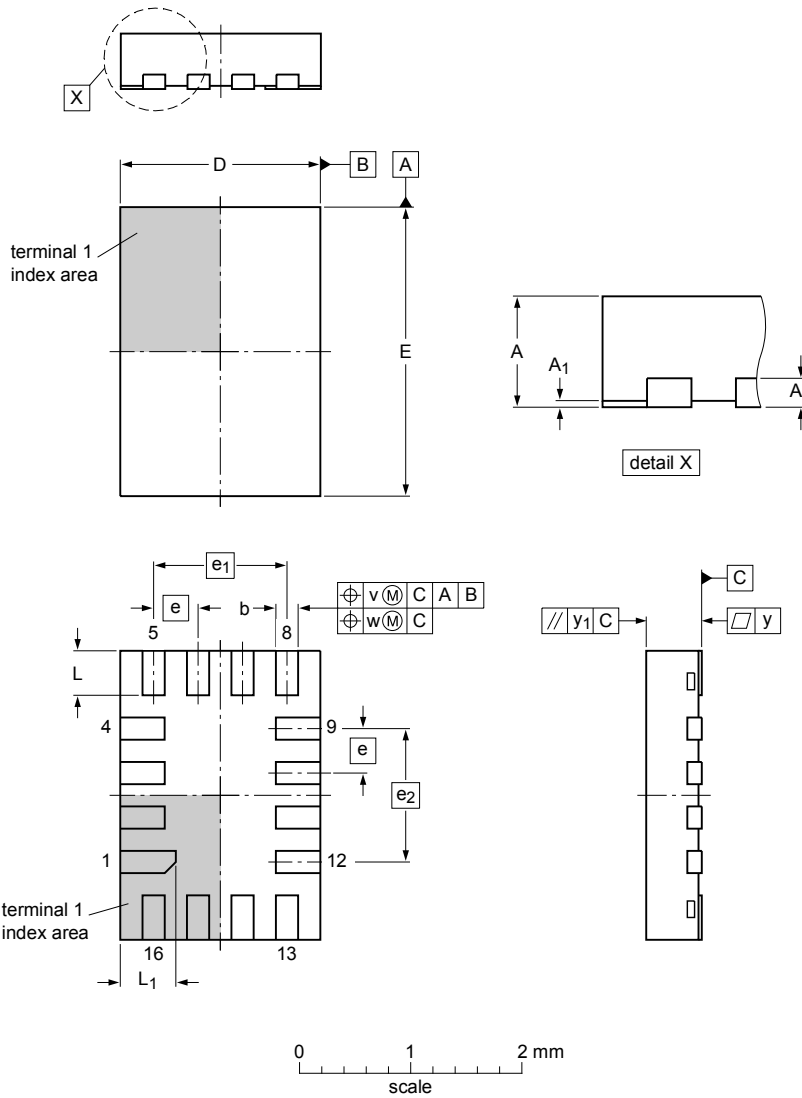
Package outline SOT763-1 (DHVQFN16)
